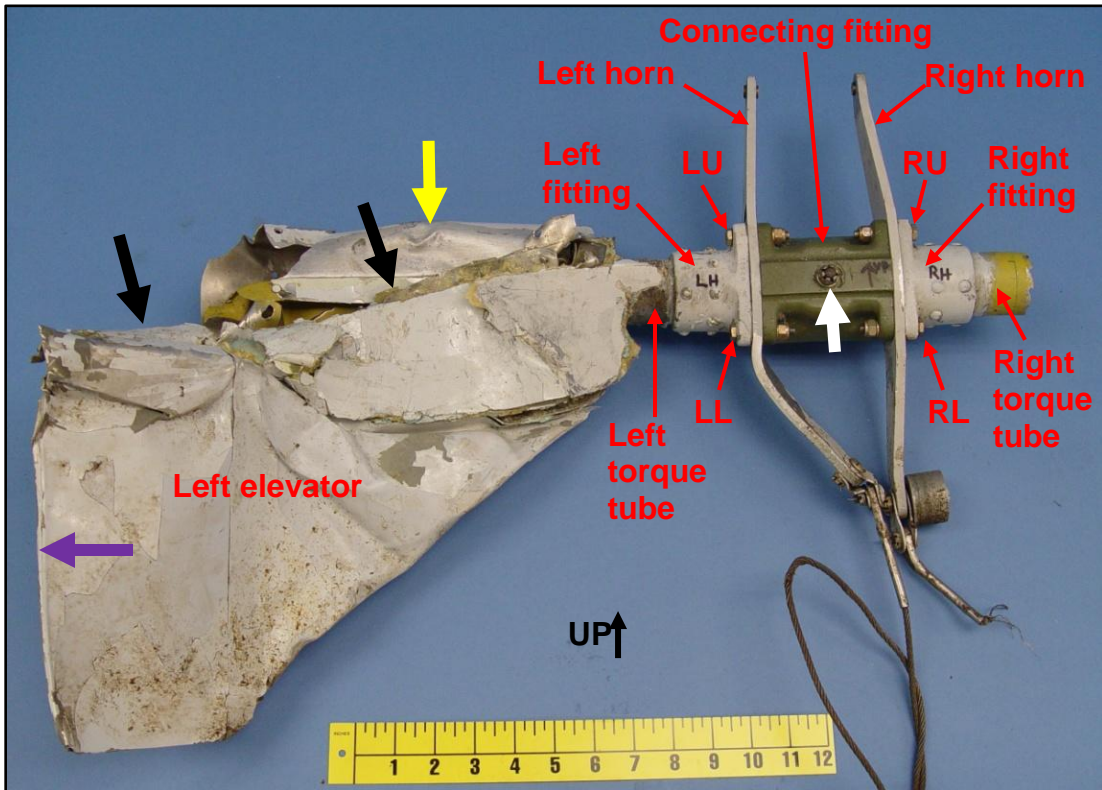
The elevator torque tube assembly and inboard portion of the left elevator received for examination, looking forward.
